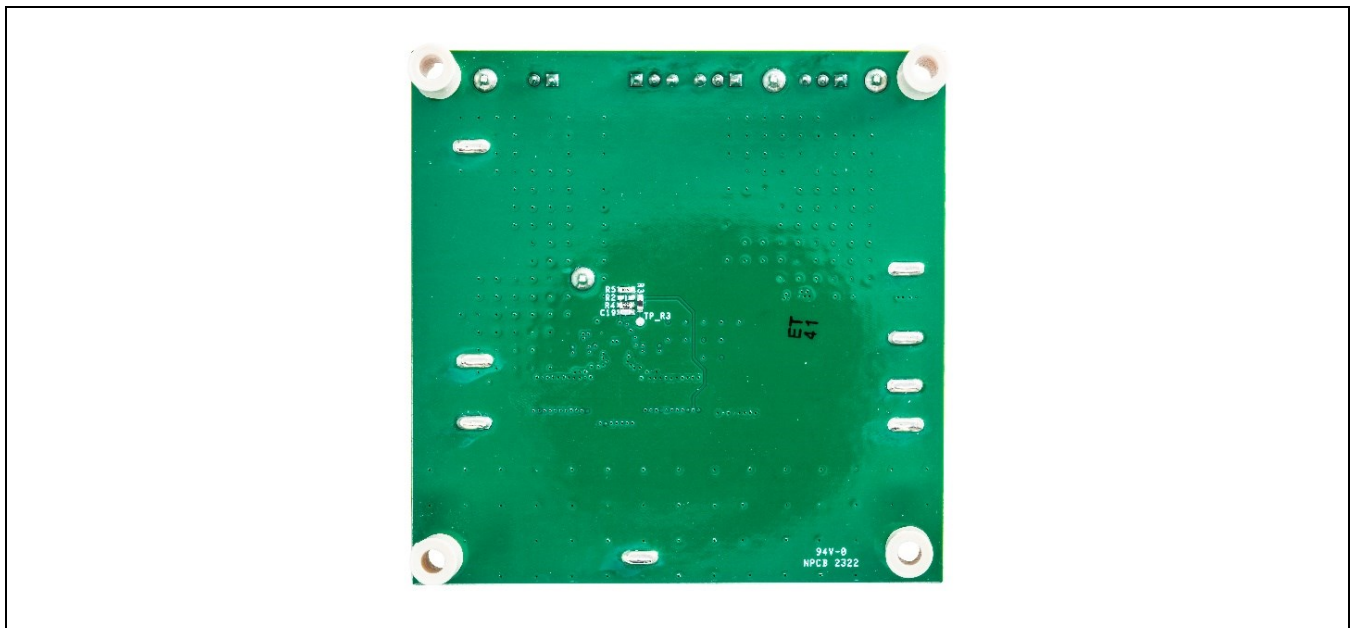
MAX42403 EV Kit Board Photo—Bottom
